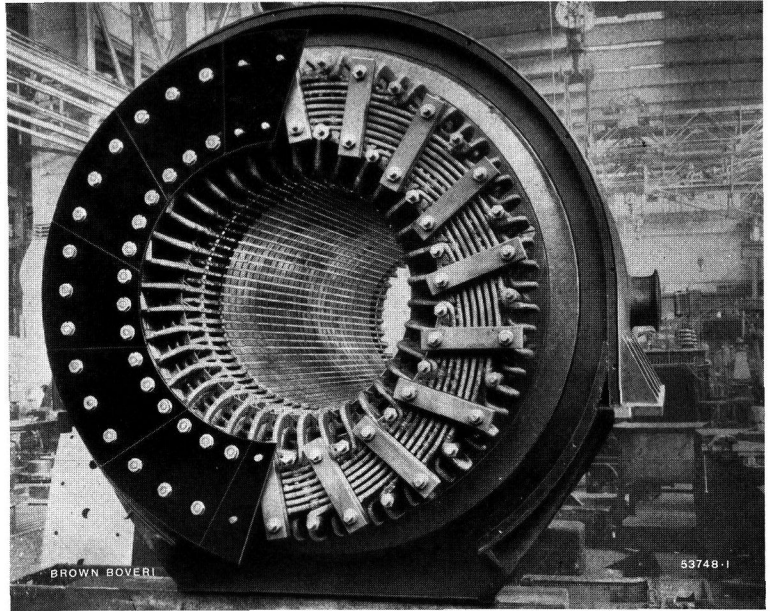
Stator of a 37,500-kVA turbo-generator with part of the shield securing the winding removed.
